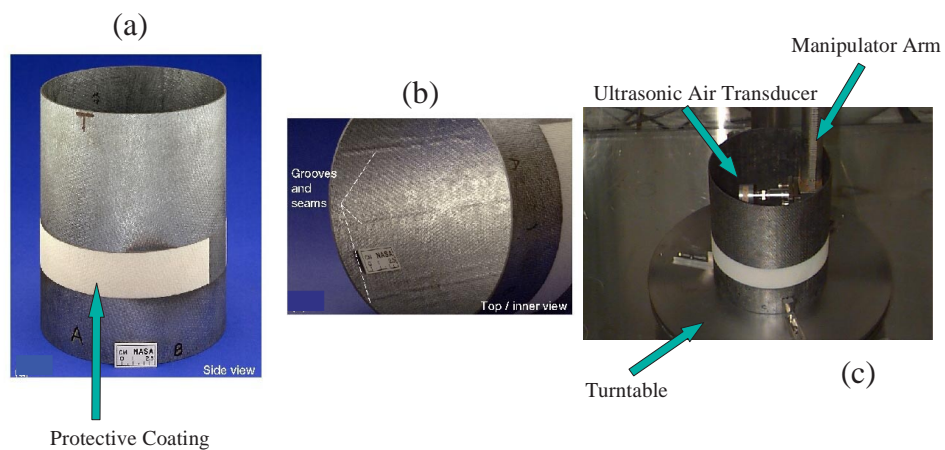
Ceramic composite cylindrical structure (a) side view showing protective coating (white strip), (b) inner view showing grooving (c) experimental set-up for inner surface profiling
